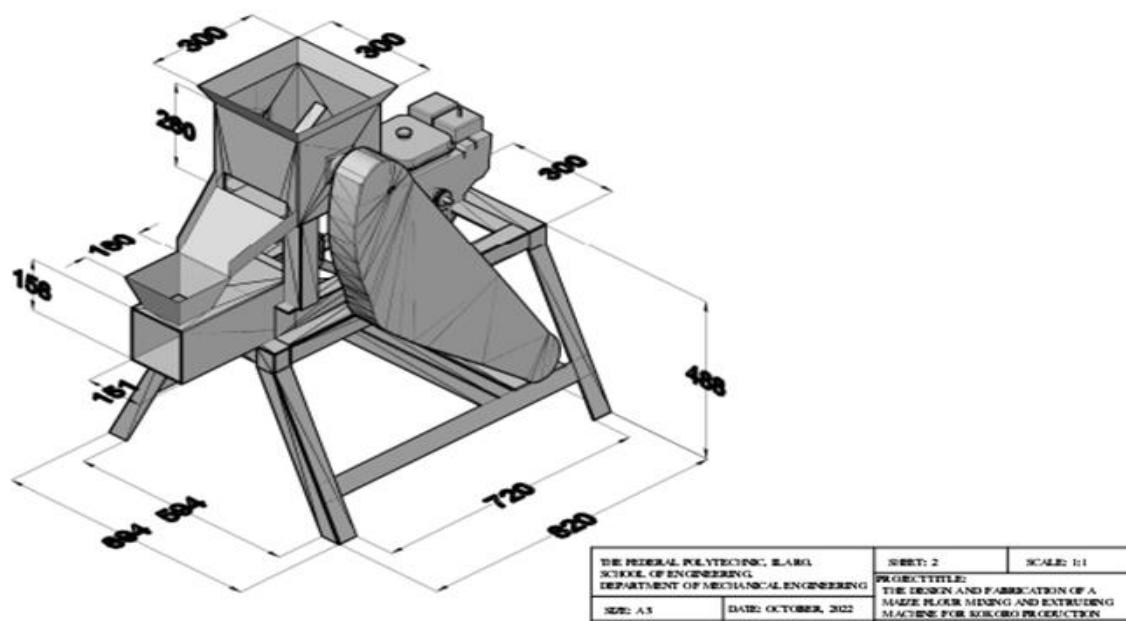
3-D Assembly Drawing of Kokoro Pasta Extruding Machine
